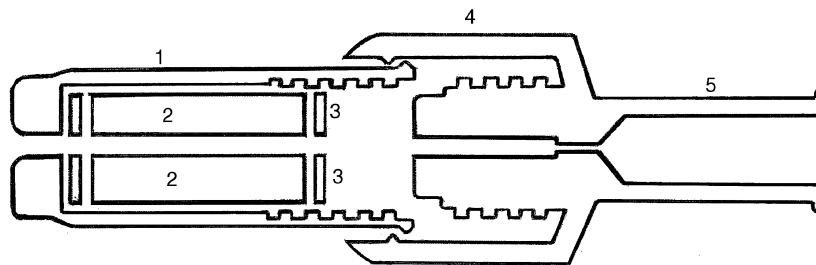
Parts of a connector assembly. 1. Body; 2. rubber cylinder; 3. metal disc; 4. retaining screw; 5. injection port.
